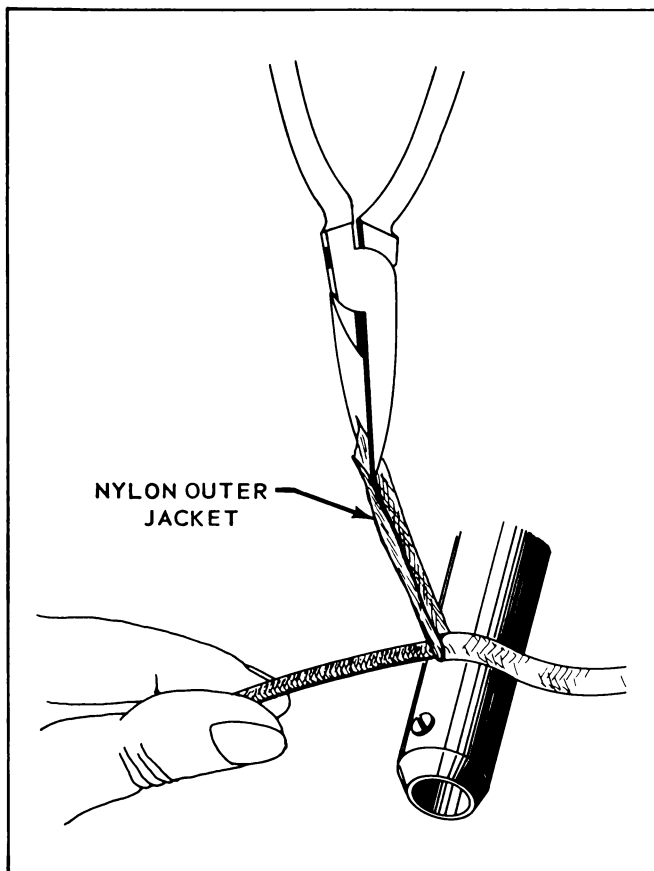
Stripping Outer Jacket from Shielded Cable
